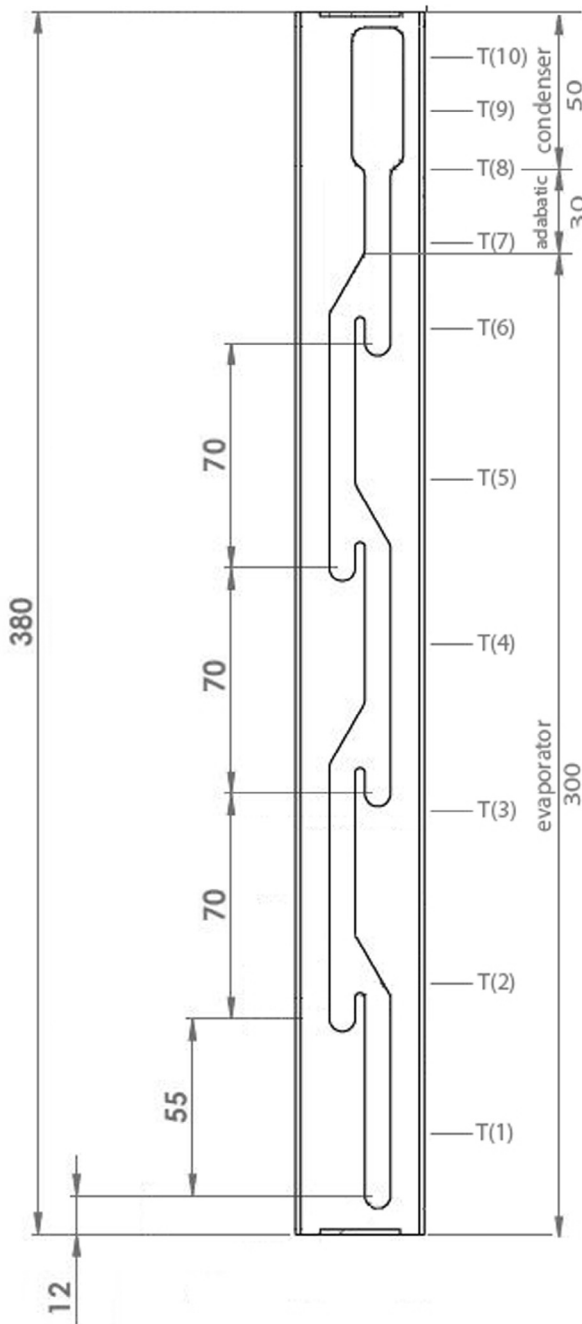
Typical dimensions for a thermosyphon with cascading pools.
